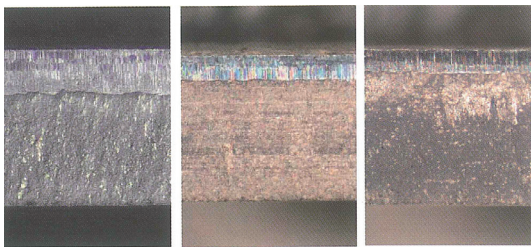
Sheet edge appearance for HR 700Y-MC, CR 800T-DP and CR 1400T-MS respectively in thickness 2 mm with 7% cutting clearance and 1° shearing angle.
